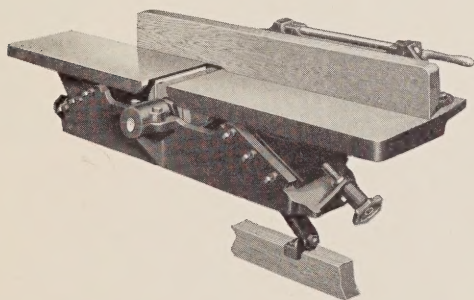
View showing Jointing Attachment with its Independent Drive.
